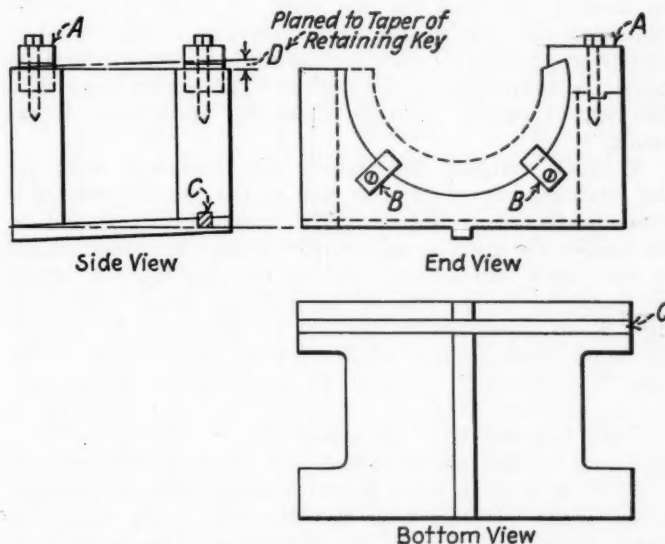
Chuck for Holding the Markle Removable Crown Brasses When Cutting the Taper for the Retaining Key
